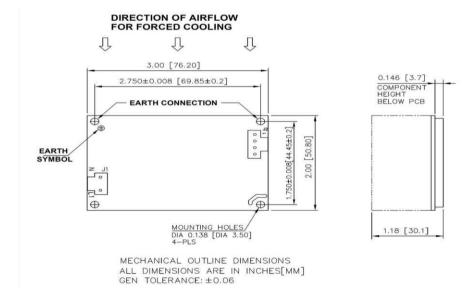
Mechanical Drawing - Molex Header (Option 2)
